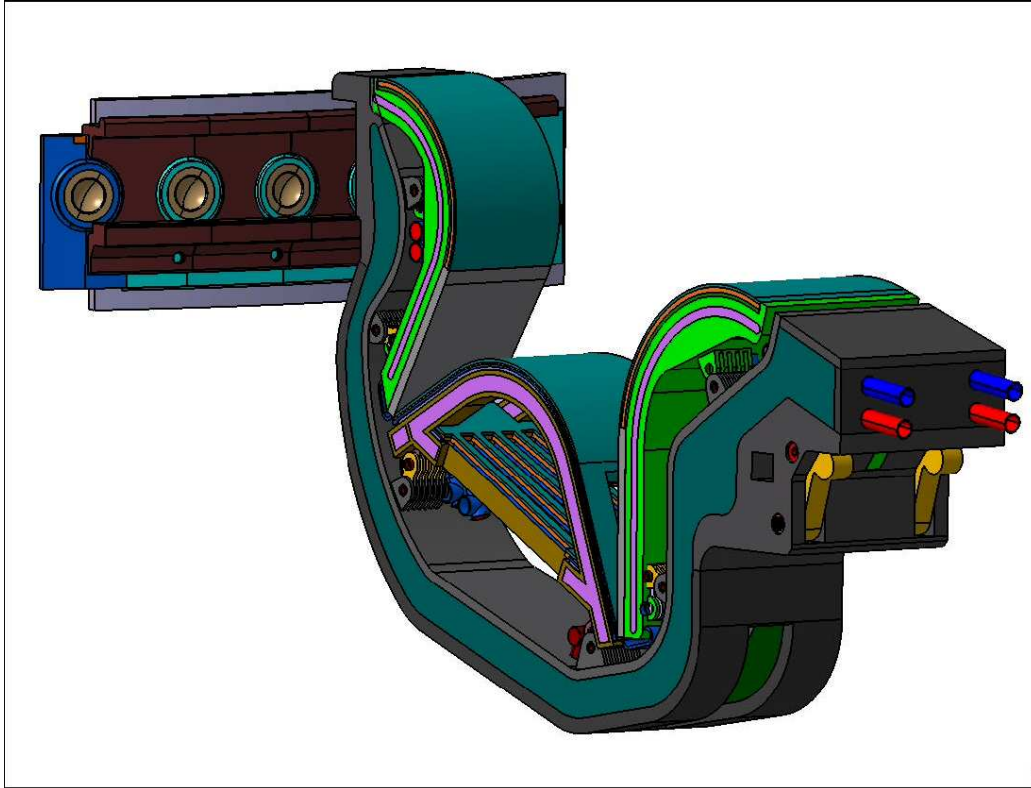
Attachment of the divertor to the inner side of the Vacuum Vessel.
